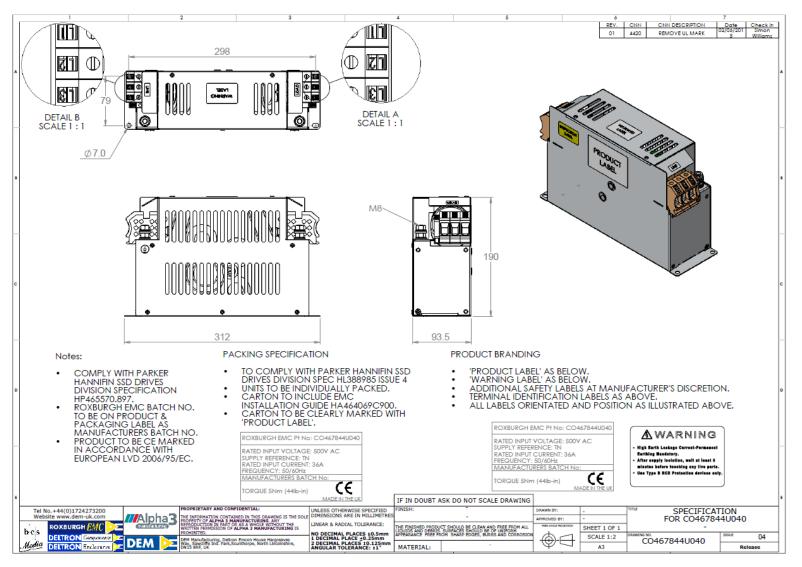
Filter Mounting Details, Part No. CO467844U040 for Frame 1:20 &35 Amp
